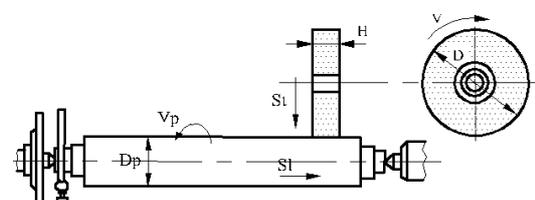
Scheme of external cylindrical grinding process of rollers on special grinding machines tools [2, 3].
